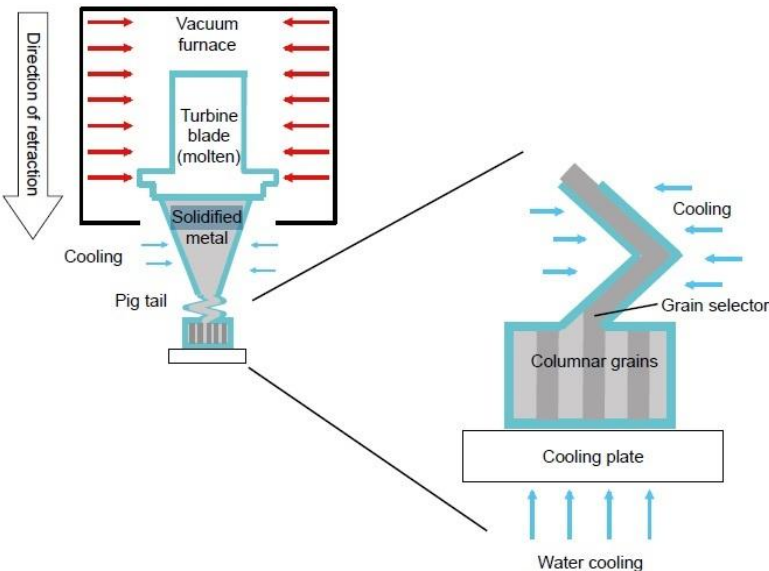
Investment casting of single-crystal turbine blade. [57]
